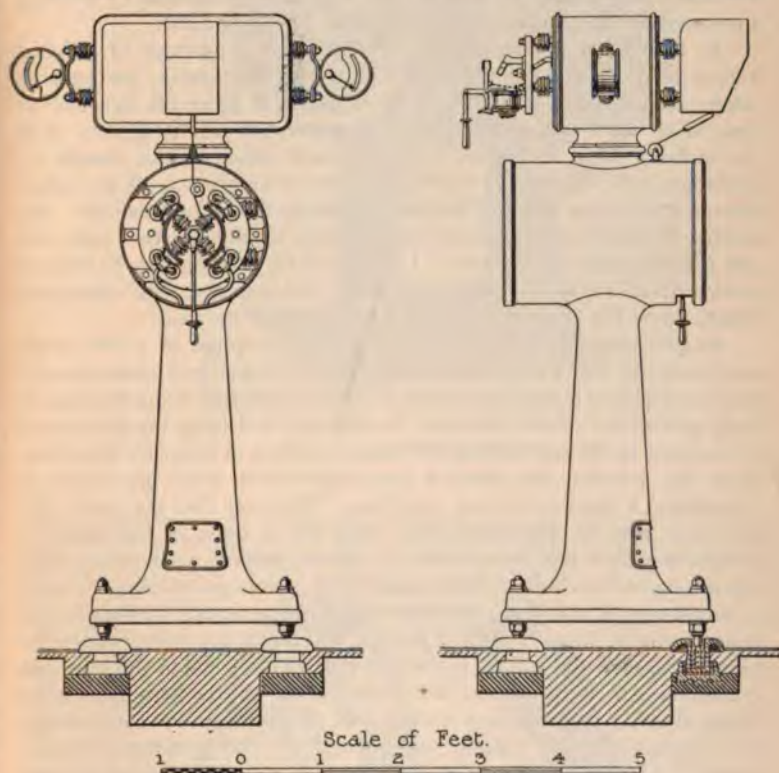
Motor Controlling Gear for 60,000 Volts.
